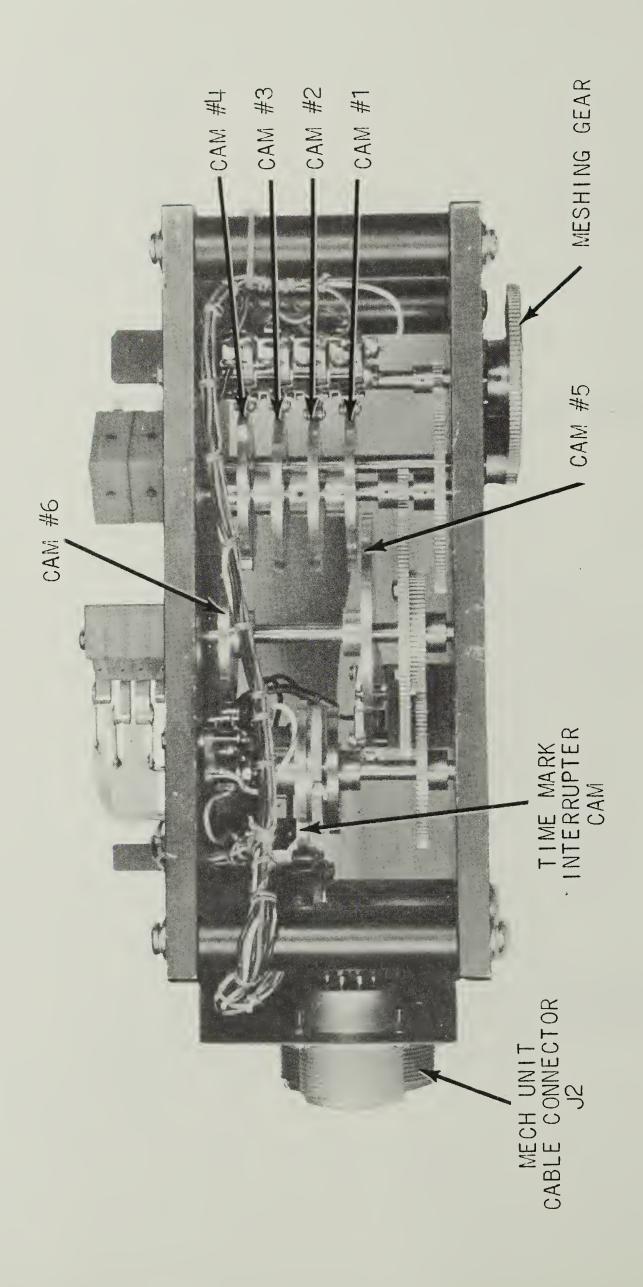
PROGRAM ASSEMBLY BOTTOM VIEW
